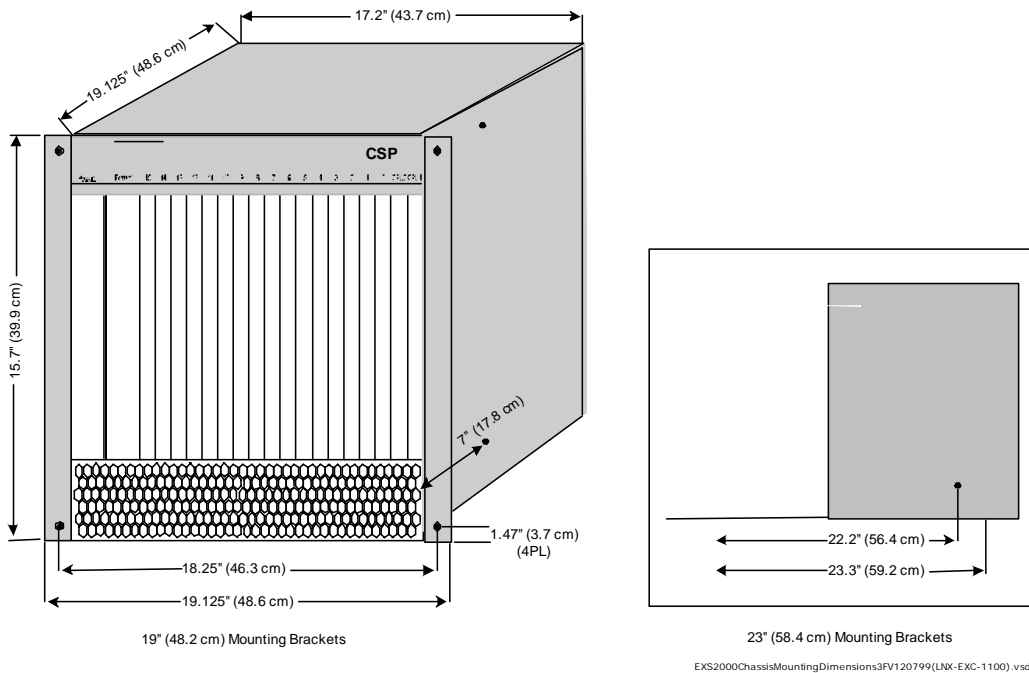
Mounting on 19-Inch and 23-Inch Racks
